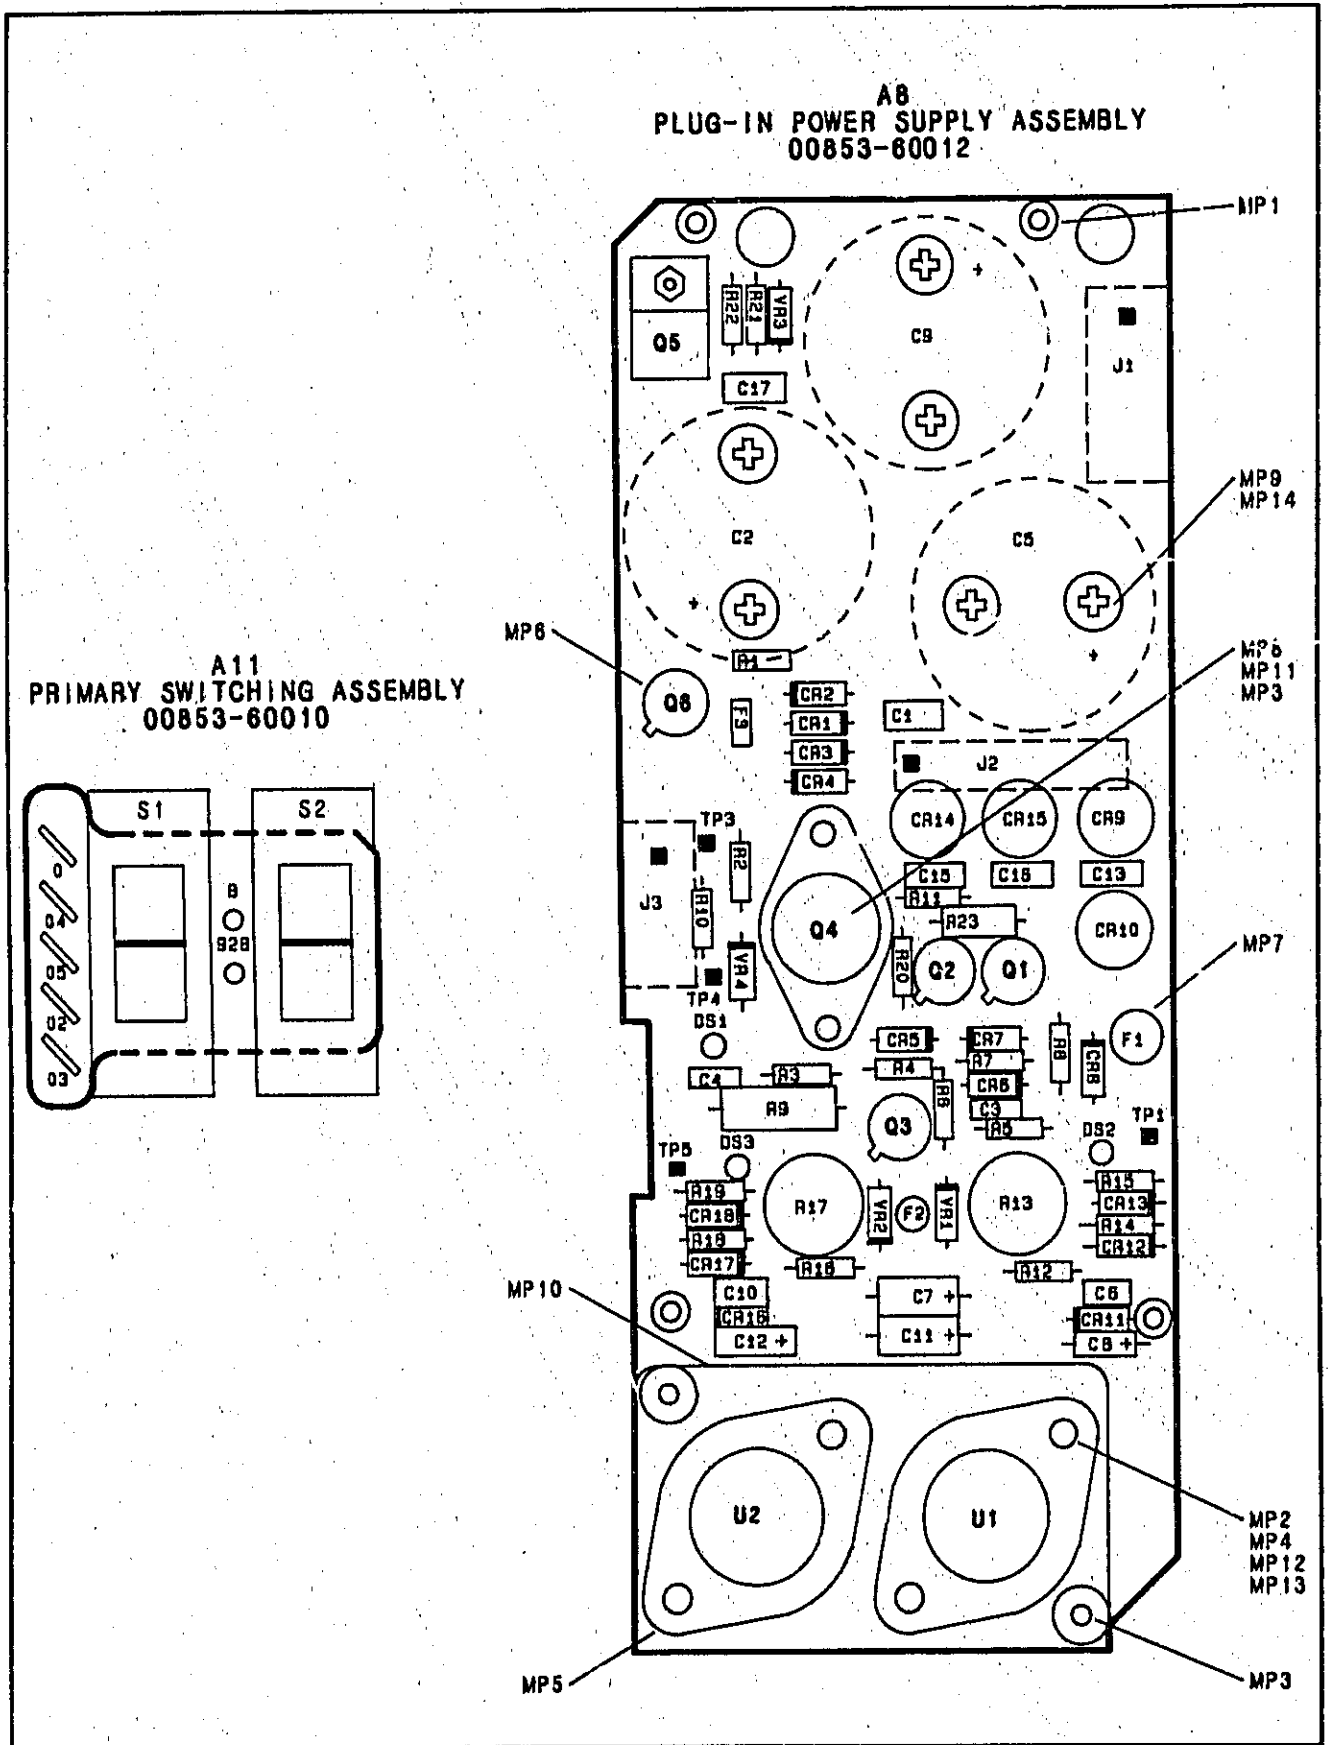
Plug-In Power Supply and Primary Switching Assemblies, A8 and A11, Component Locations
